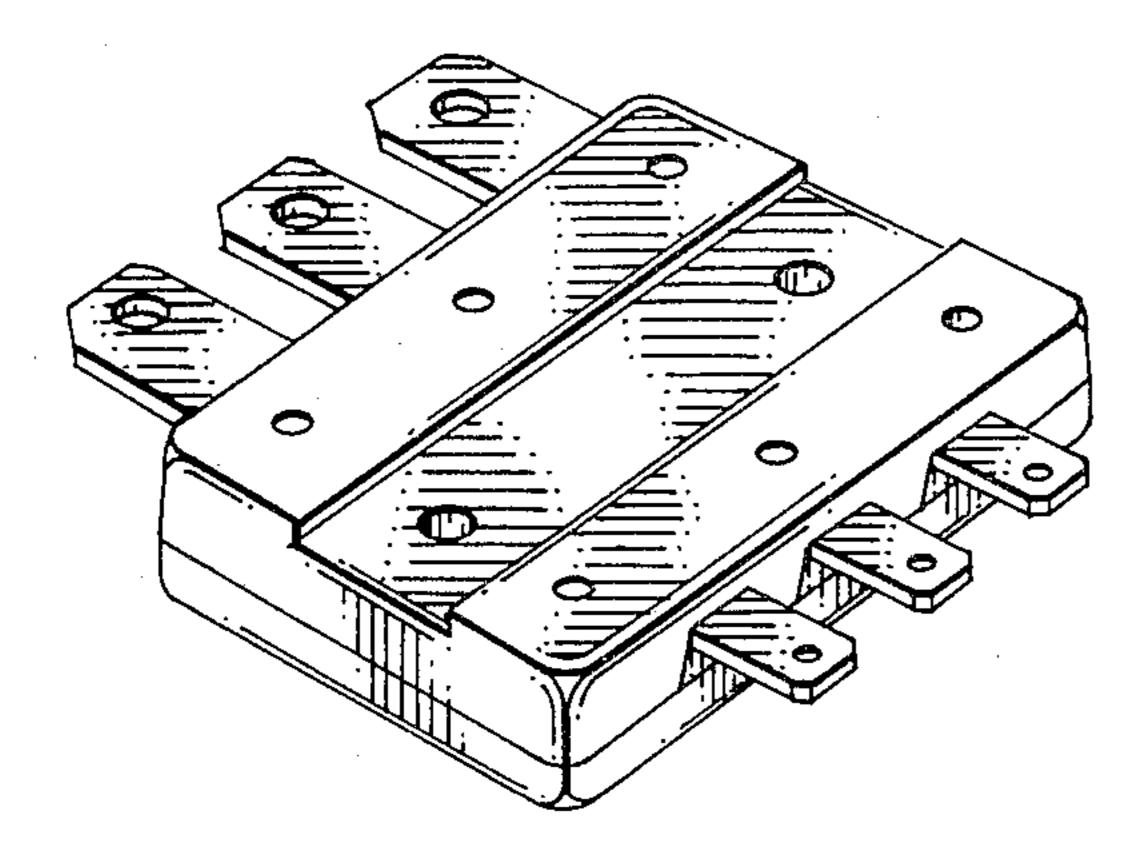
is a right side, top and front perspective view of a sixth embodiment of my new design;
